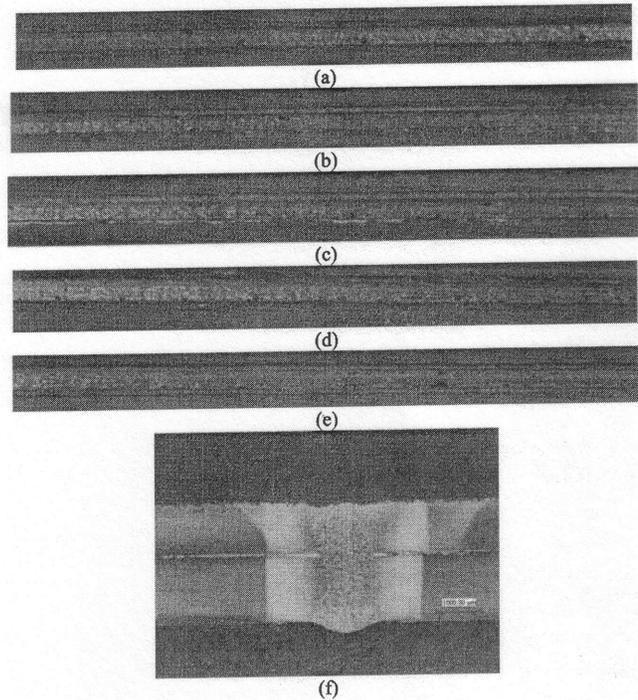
The effect of the welding speed on the weld quality. (a) $v = 1.8$ m/min, (b) $v = 2.1$ m/min, (c) $v = 2.4$ m/min, (d) $v = 2.7$ m/min, (e) $v = 3.0$ m/min, and (f) the cross-section view of the laser/GTAW preheated welds at the welding speed of 3.0 m/min.
